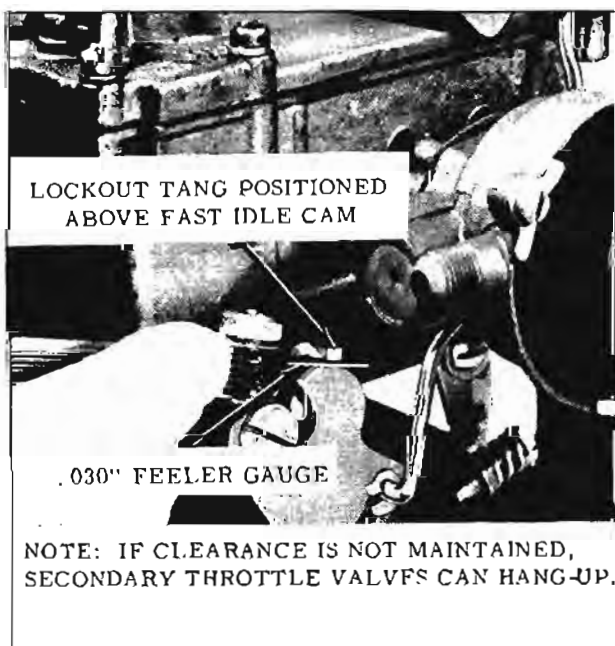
Secondary Throttle Contour Clearance Adjustment
